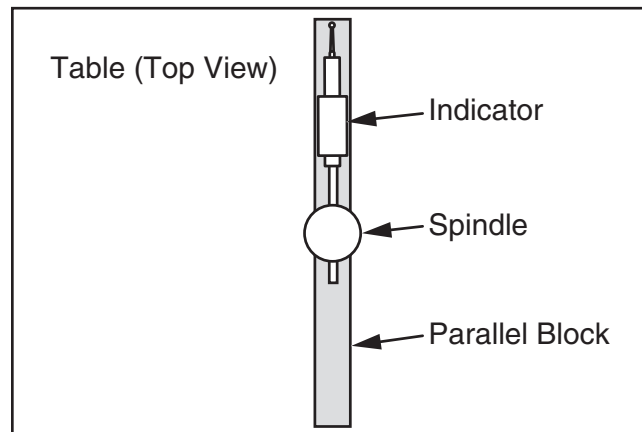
Parallel block and indicator positioned for the Y-axis measurement (top view).
